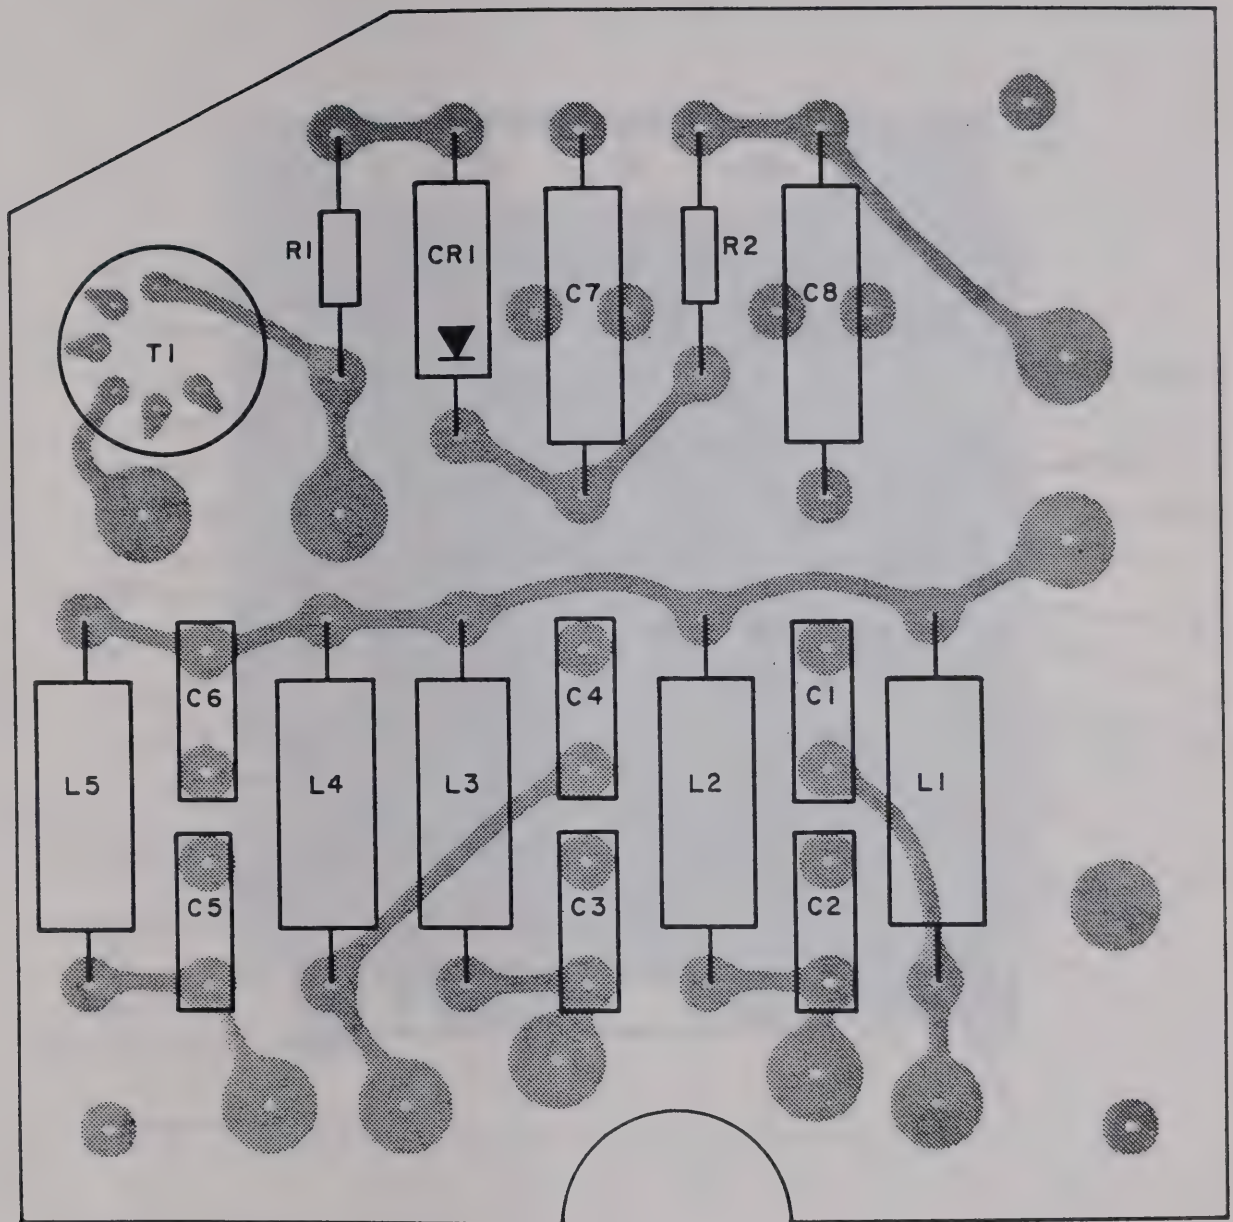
Front-Deck Supply Decoupling Board A1A2A8, Parts Location
